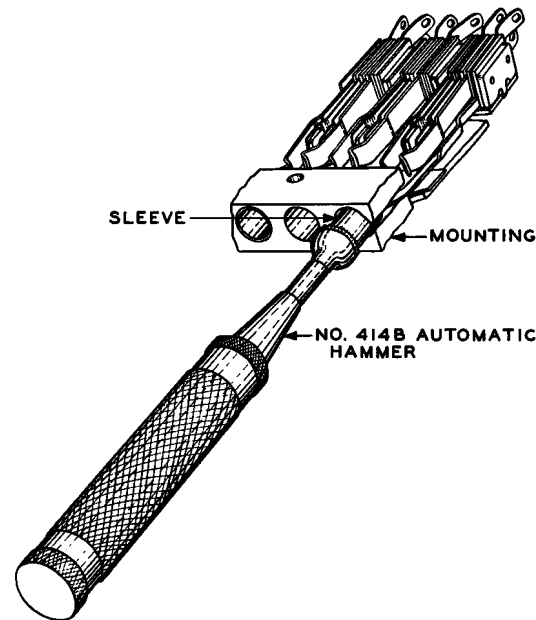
Method of Driving Sleeve Into Mounting With 414B Automatic Hammer
